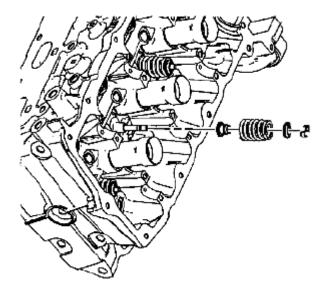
Identifying Valve Courtesy of SUZUKI OF AMERICA CORP.
